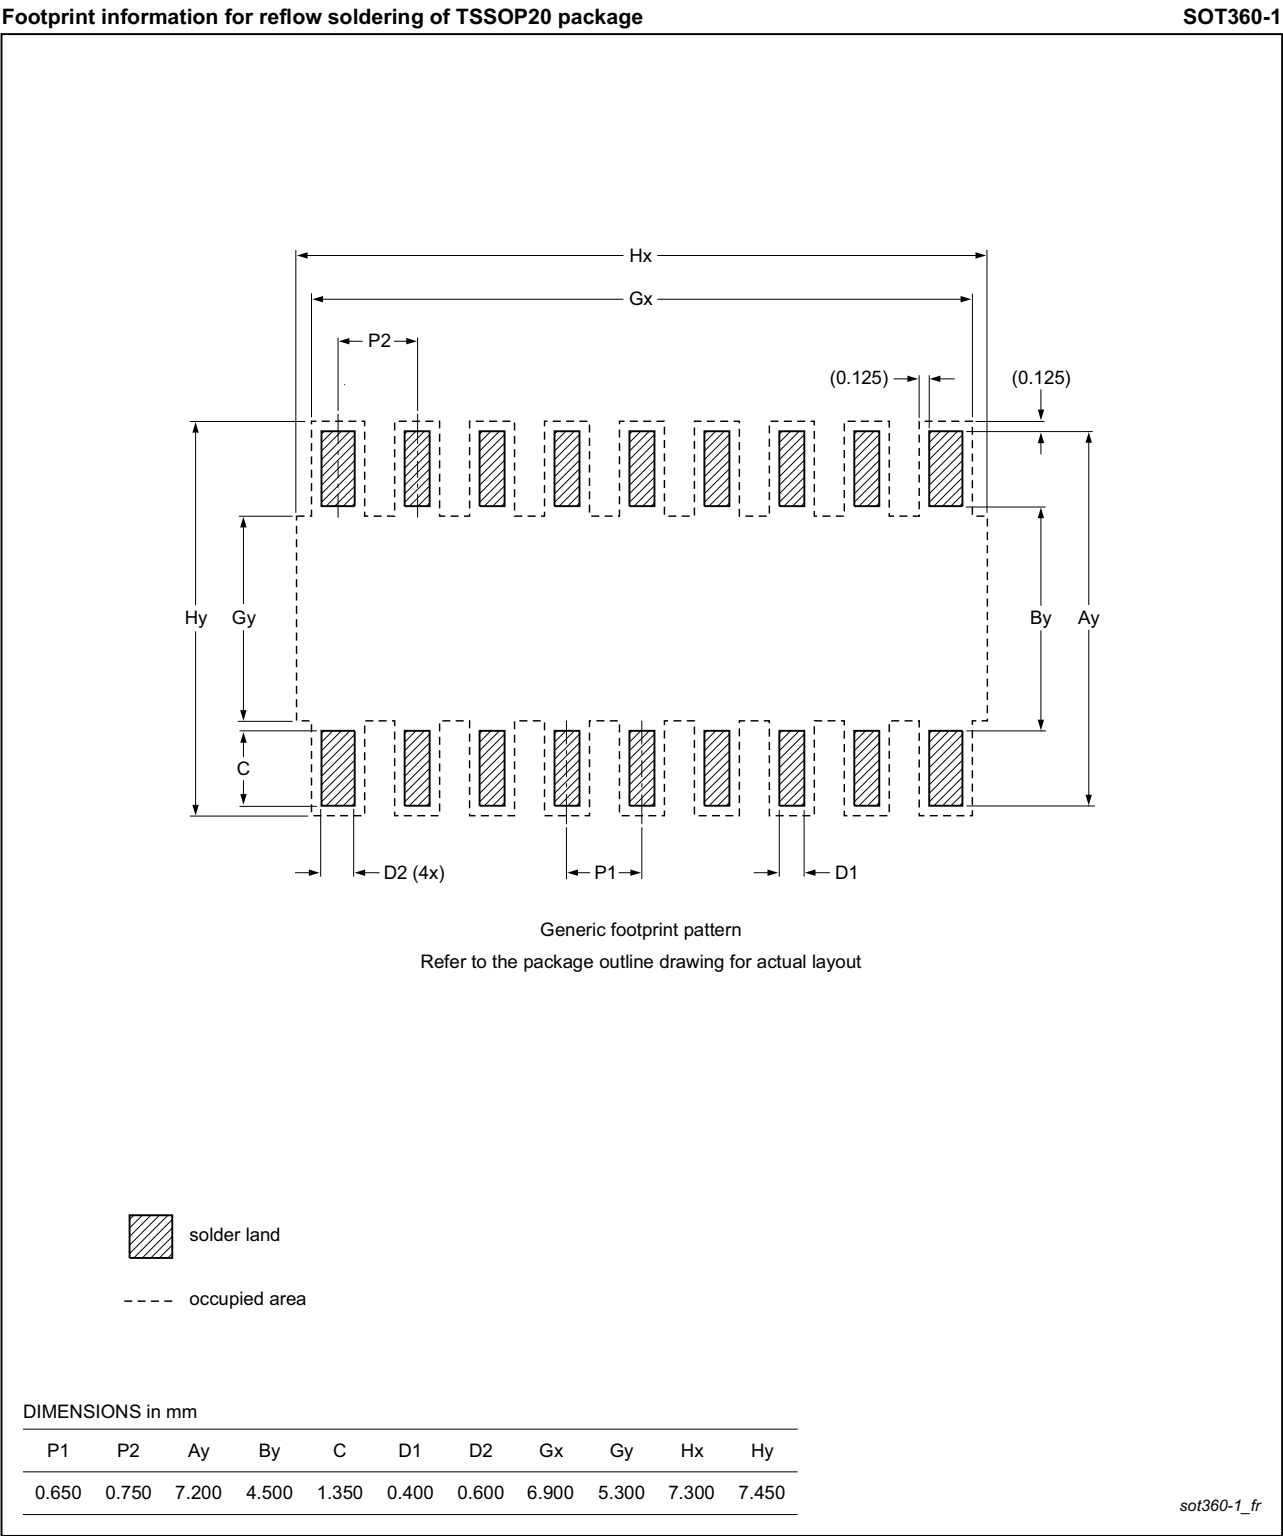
PCB footprint for SOT360-1 (TSSOP20); reflow soldering
